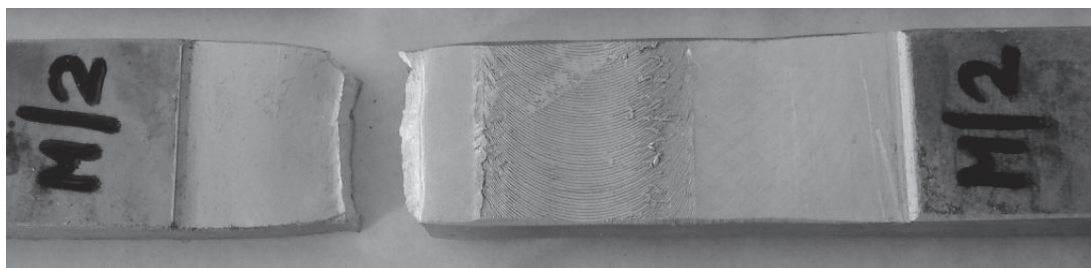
Sample view of 7020 alloy welded by FSW subjected to the static tensile test - a crack in the native material
